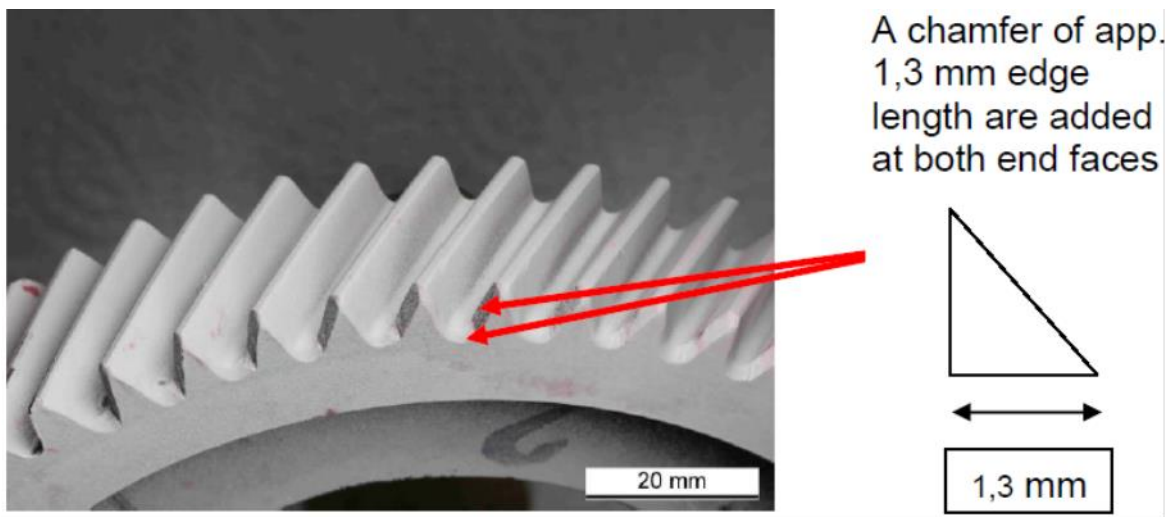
Schematic of a gear with chamfering of the entire tooth profiles.
